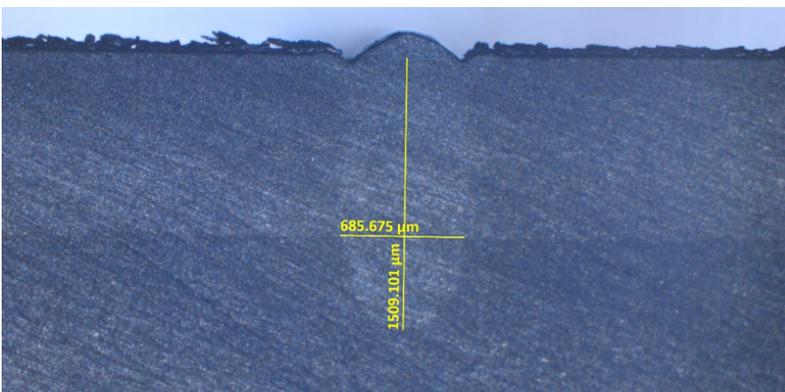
Another design included asymmetrical material, with the top plate measuring 1 millimeter in thickness and the bottom plate measuring 3 millimeters.
